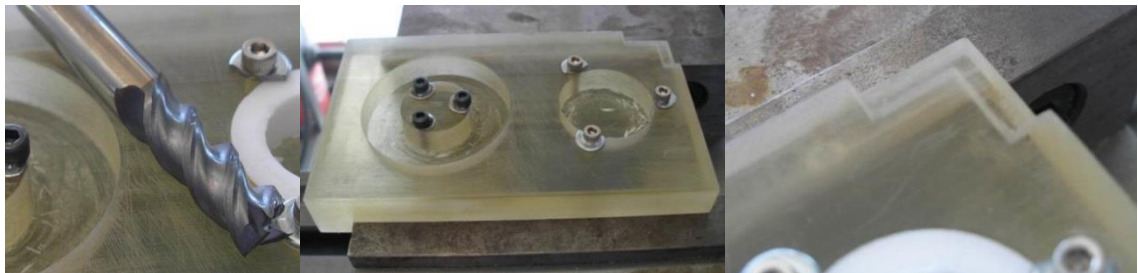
| 3-D printed jig for diameter cutting. Left: 3/8" endmill used for cutting the Teflon tubing. Middle: The jig is clamped into the vise. Right: reference corner used for zeroing.
